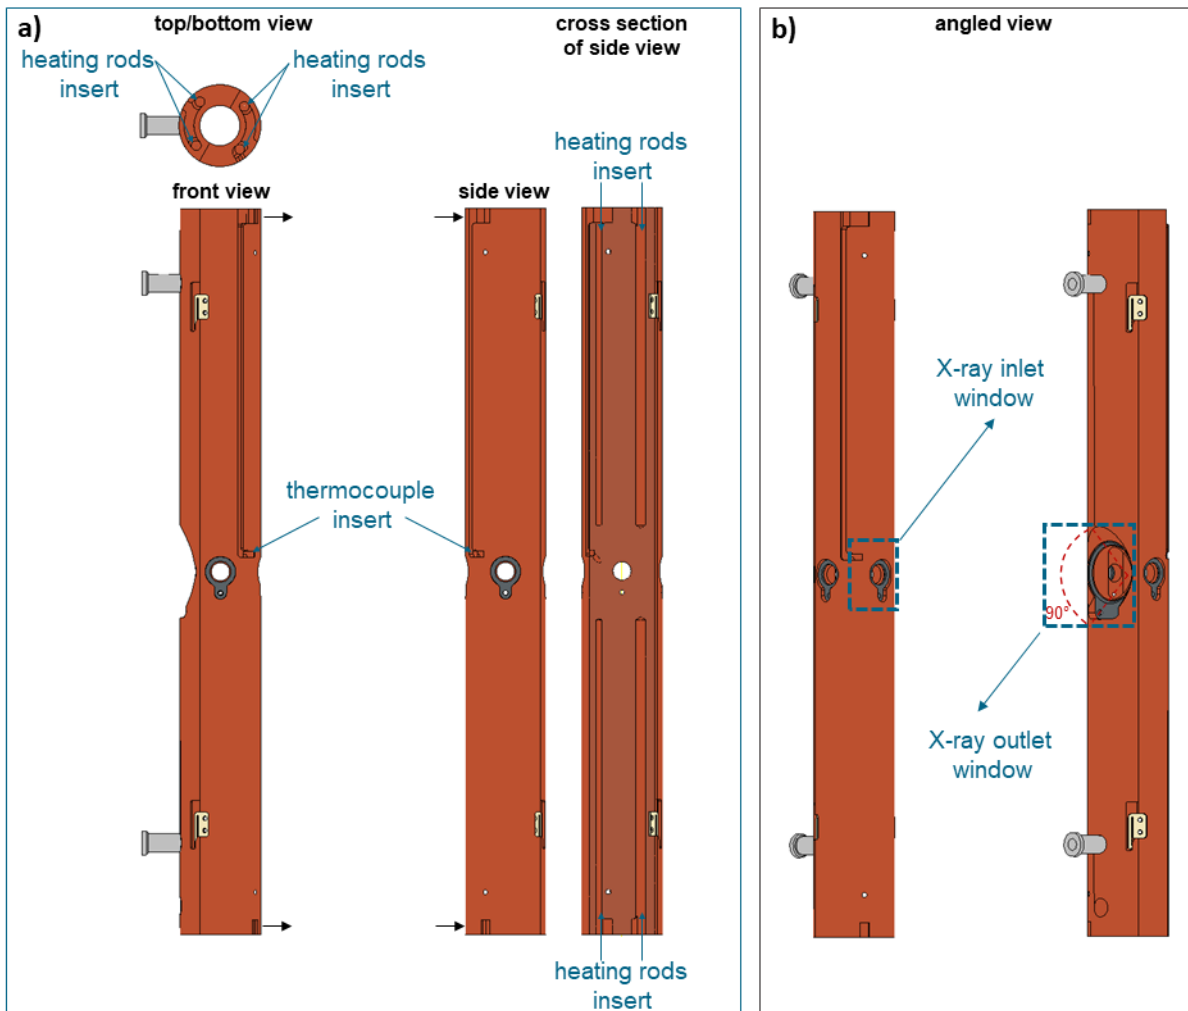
Technical drawing of the oven. (a) Top/bottom, front and side views with thermal insert. Cross-section and top/bottom view show the heating inserts. (b) Angled view of the inlet and outlet windows for the X-rays.
